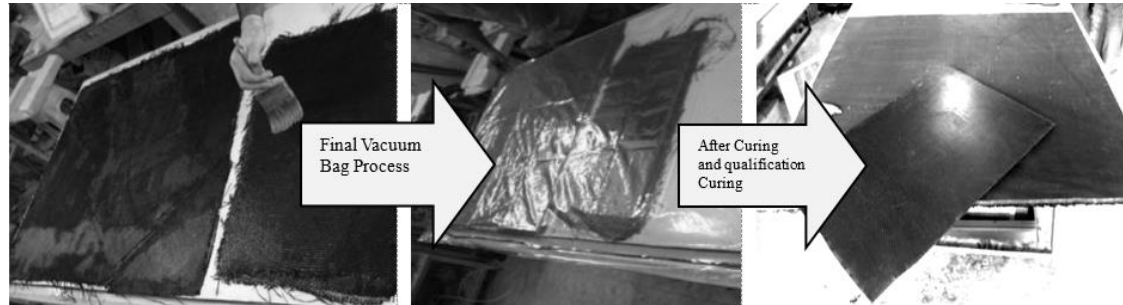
Hand lay-up process, sandwich panel vacuum bag and pressure process and trimmed sandwich panel
